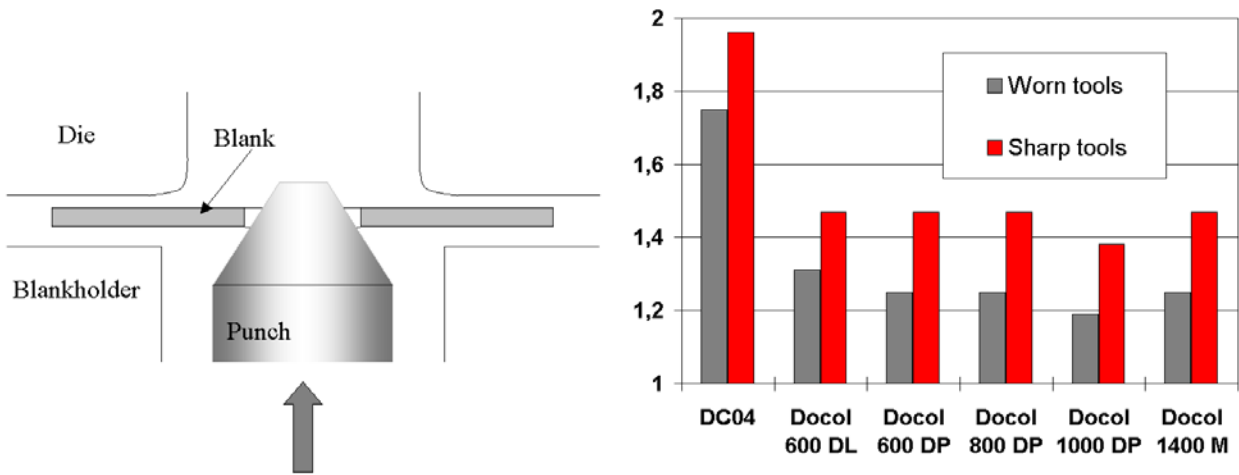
a) Hole expansion test. Arrow indicates punch movement. b) Hole expansion results.
